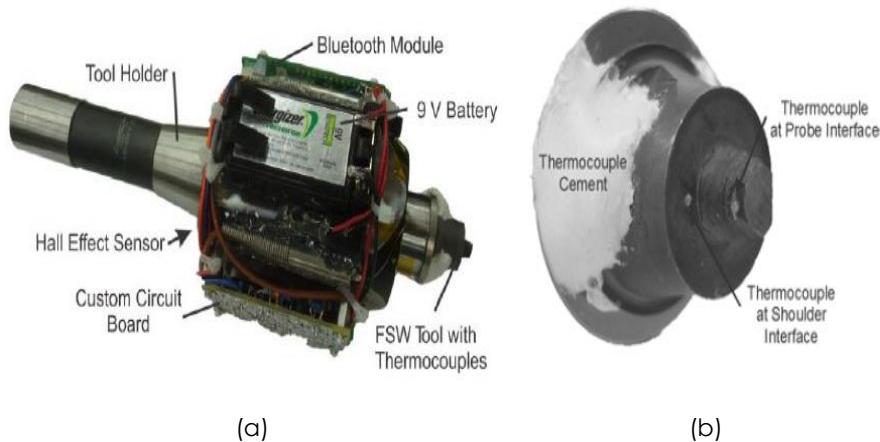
(a) Tool holder for FSW process distribution of thermocouples; (b) Detailed distribution of thermocouples [3-20]
